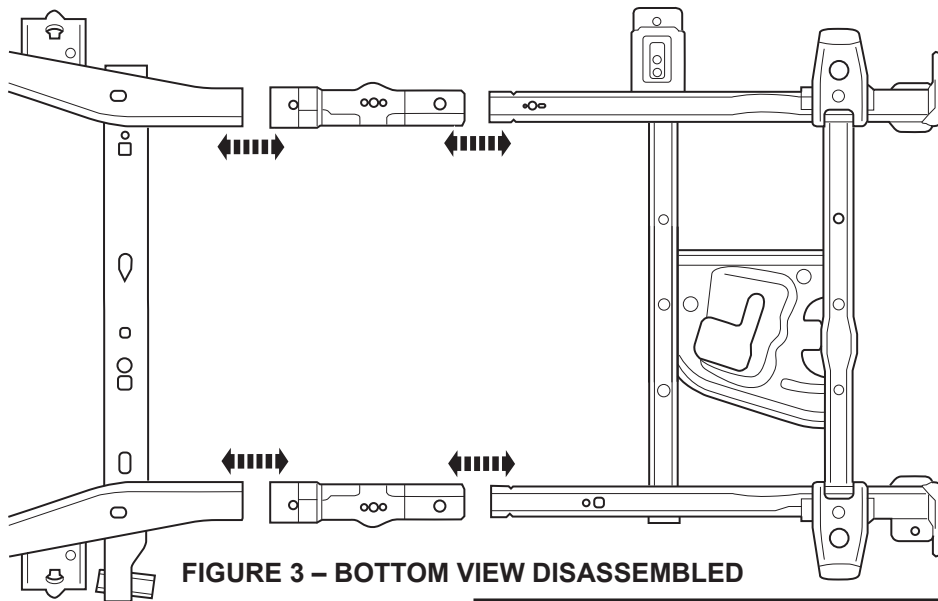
BOTTOM VIEW DISASSEMBLED
